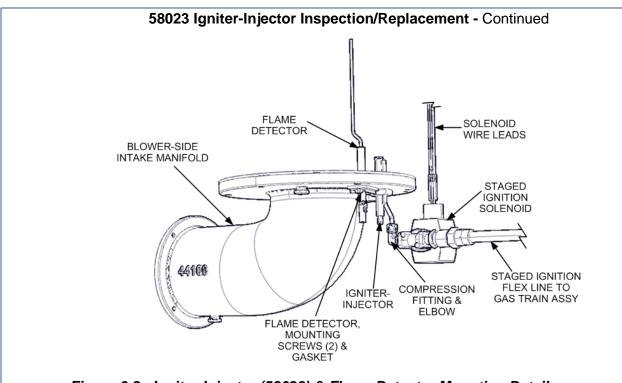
Igniter-Injector (58023) & Flame Detector Mounting Details
